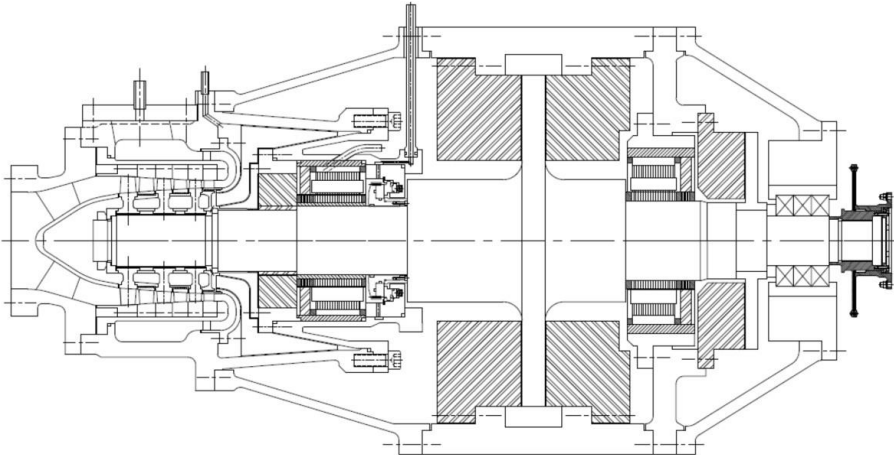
Magnetic Bearing Spindle With a 10 MW sCO₂ Turbine
